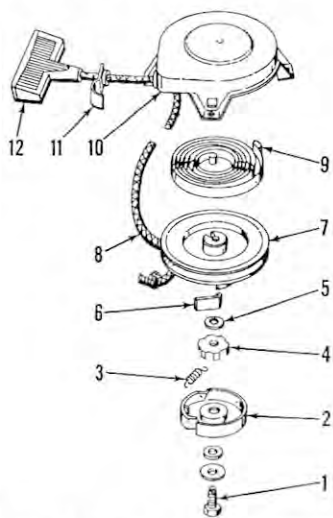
Exploded view of recoil starter typical of that used on most models.
